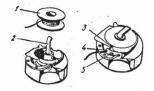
Tie the bottom thread on the V 292-185082 machine
